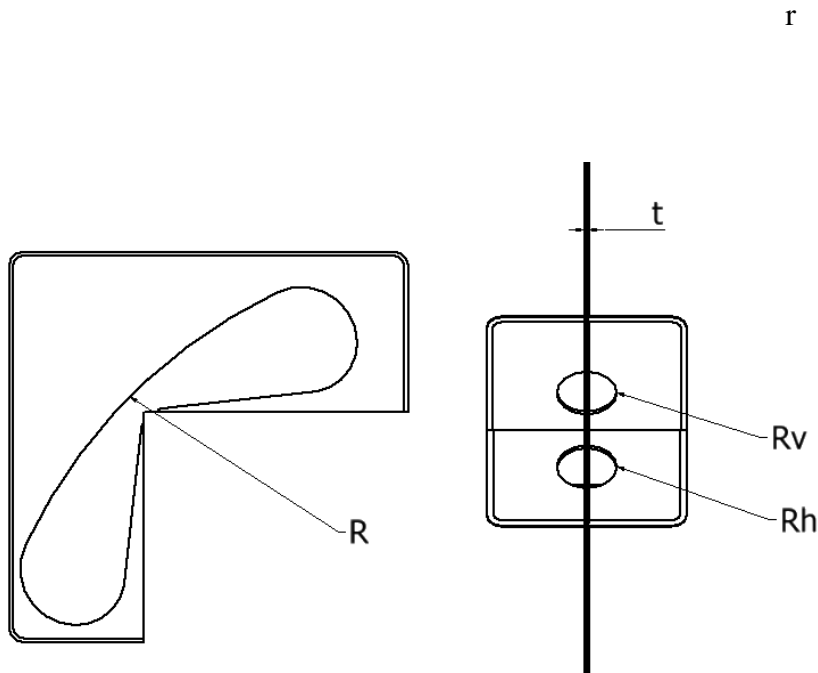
Governing dimensions of the cut-out design. XZ-view (left) with the cut-out radius R and isometric-view (right) with plate thickness t and both vertical and horizontal tapering plates with hole radius r .
